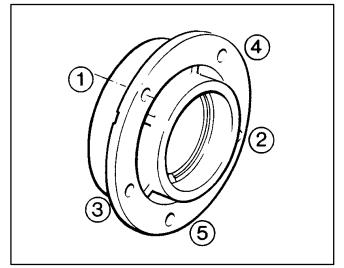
BEARING HOUSING TIGHTENING SEQUENCE
